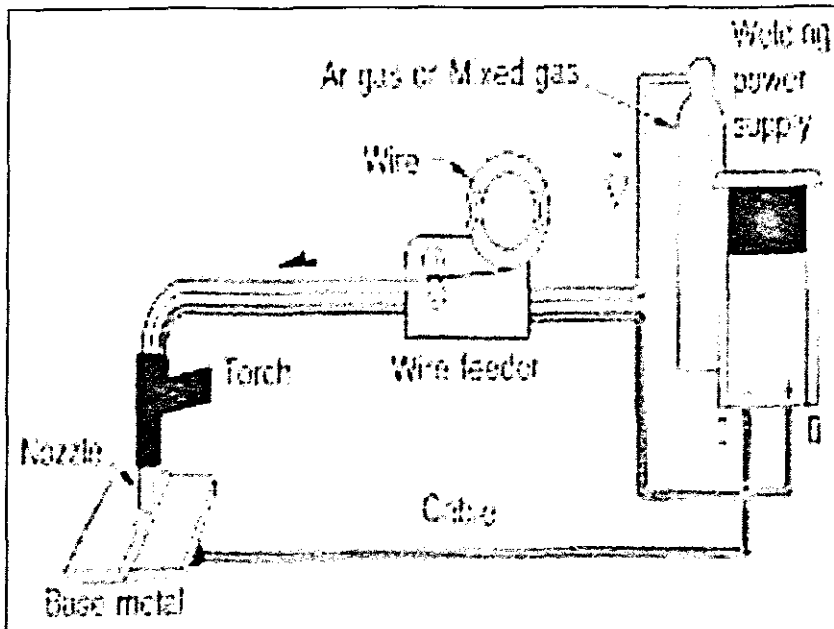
(a) Typical GMAW Set-up. Reprinted from Operation Guide, CO₂MAG Semi-Automatic Welding Machine [44].
